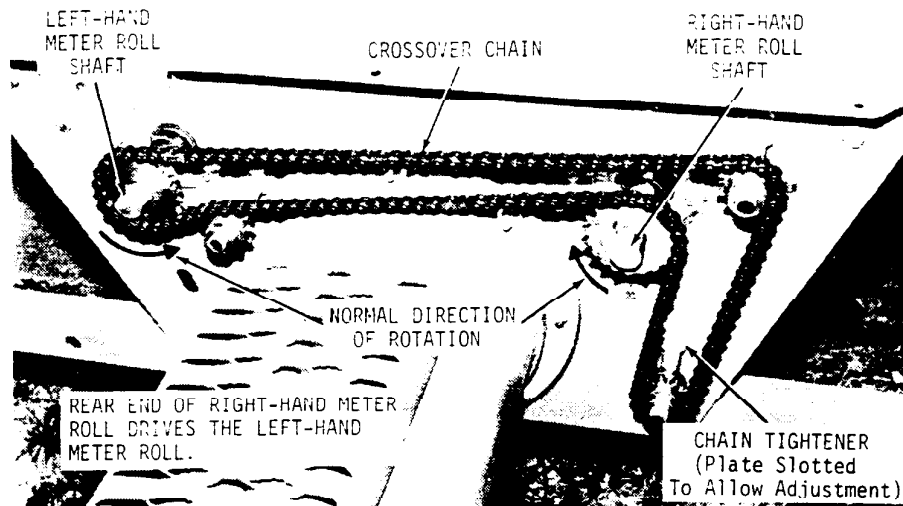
DISCHARGE END VIEW OF METER ROLL DRIVE PARTS
